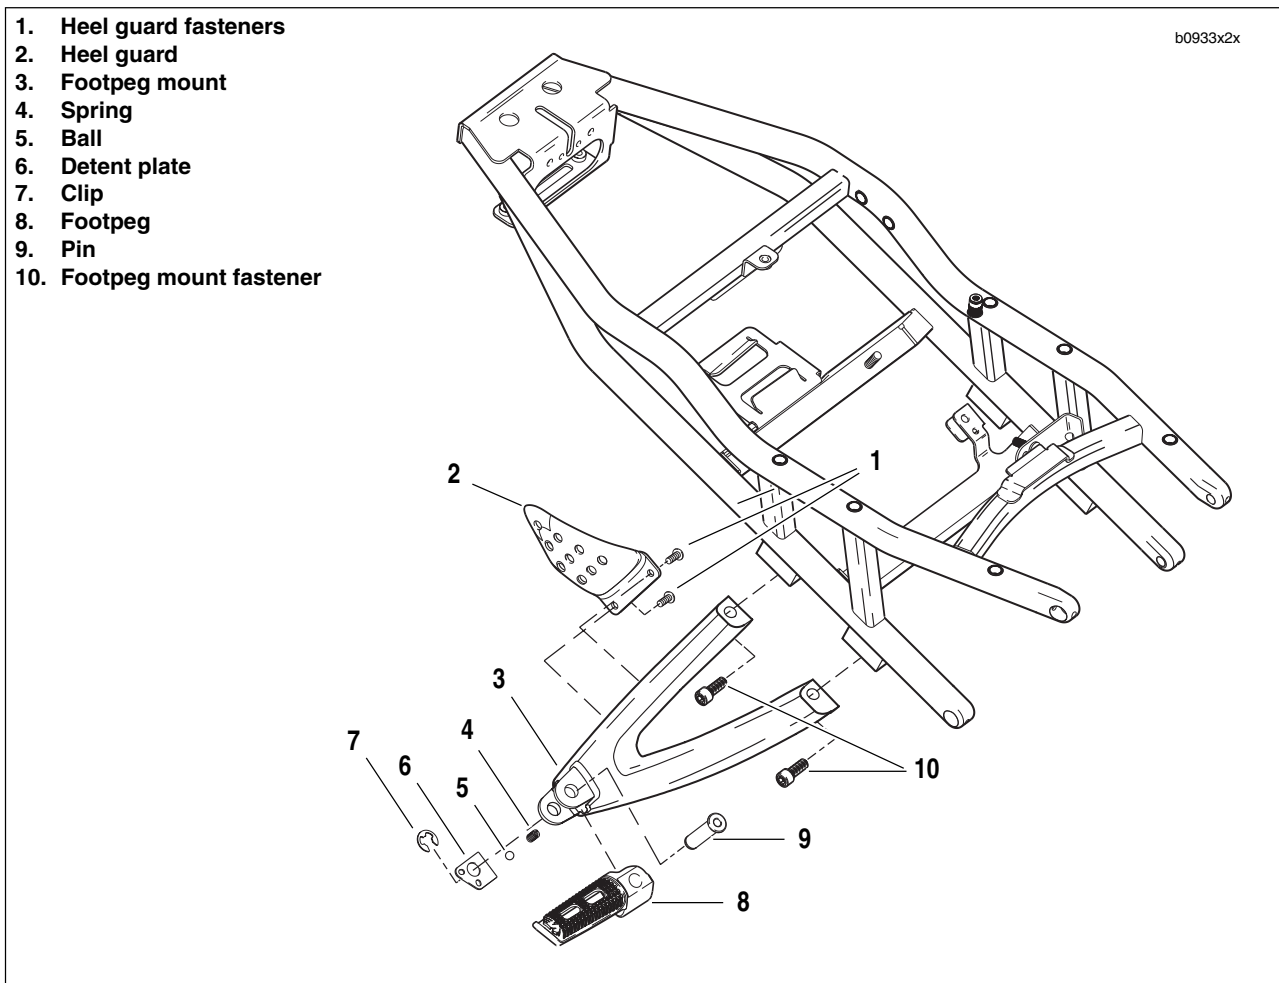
Passenger Footpeg, Mount and Heel Guard Assembly
